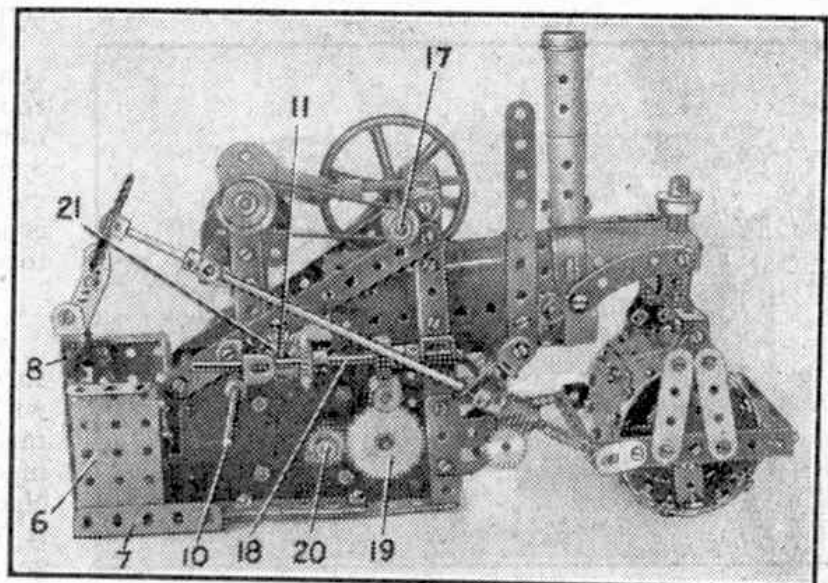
The road roller with right-hand road wheel and canopy removed to show the interior arrangements.
